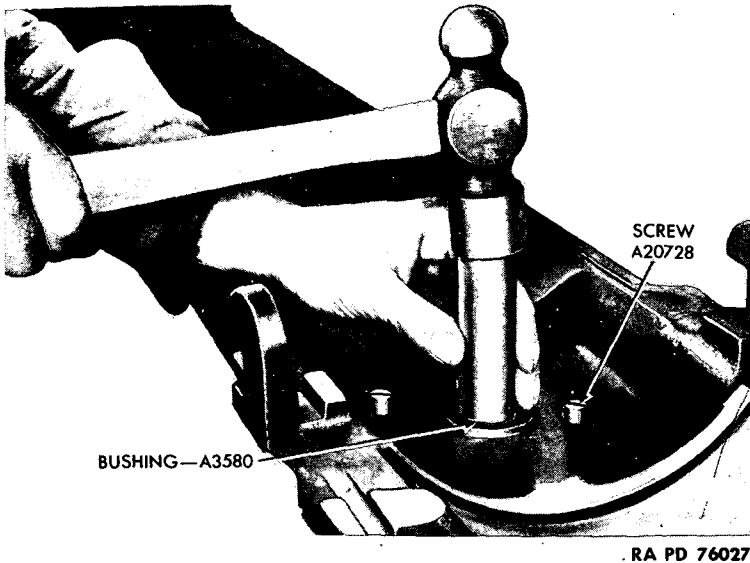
Removing Top Sleigh Clamping Cam Bushing
